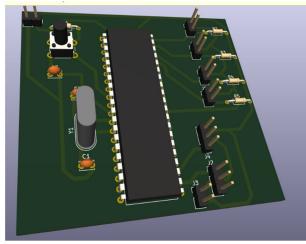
Final PCB Layout of Dual Axis Solar Tracker System
